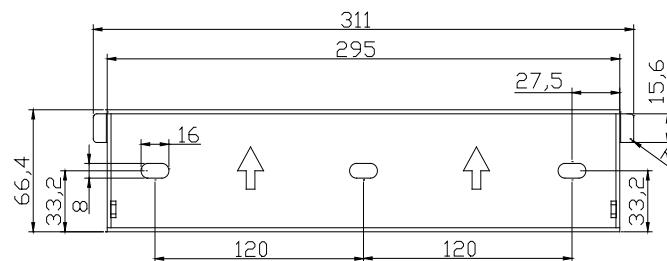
Dimensions of rear panel of R5-3K/3.6K/4K/5K/6K-S2
